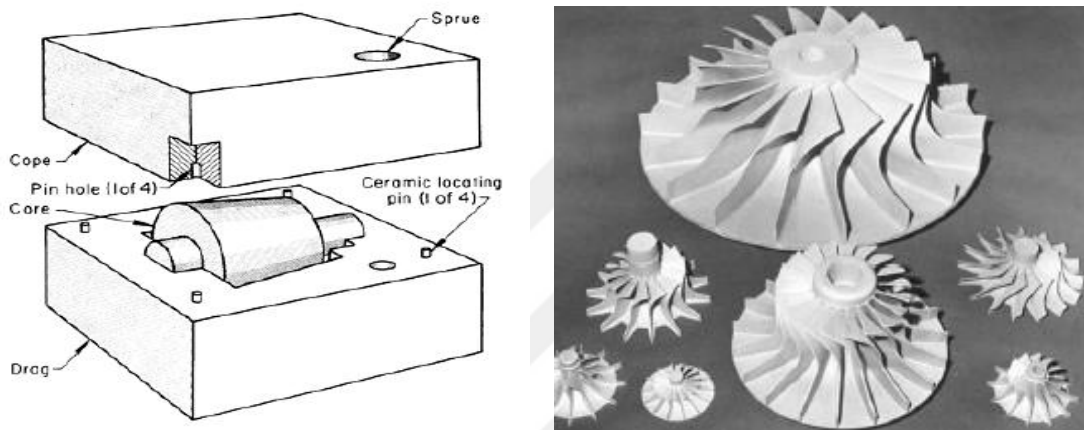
a)Mold assembling[1] b)Alloy 224.0 impellers produced by plaster casting [2]
